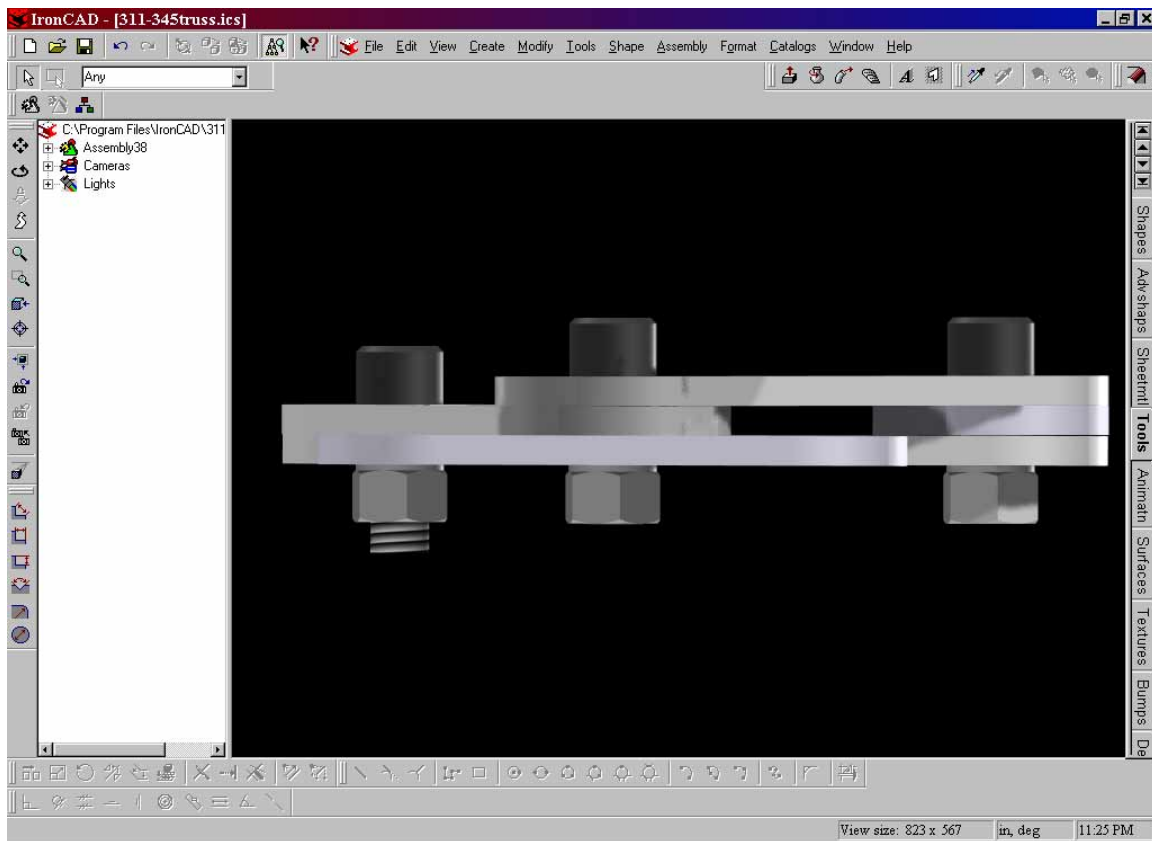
Rendered assembly using IronCAD™ highlights thread length problem
